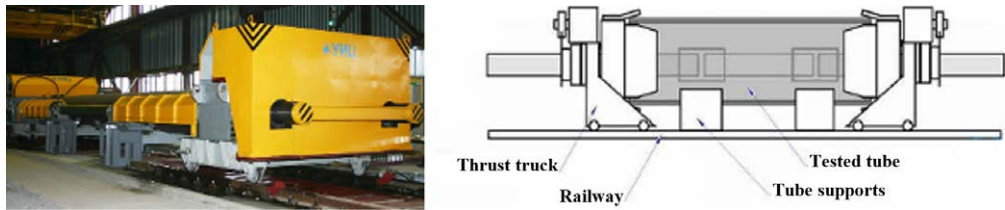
Design of hydraulic press for large diameter tubes testing
